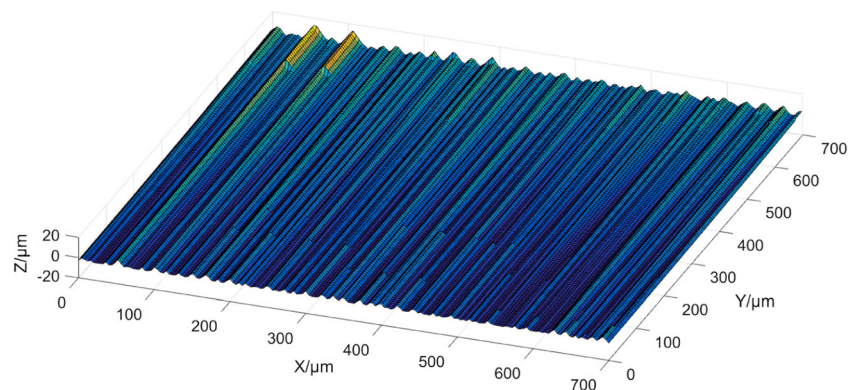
Grinding workpiece surface obtained at $f_d = 50$ $\mu\text{m}/\text{r}$, $A = 6$ μm , and depth of cut = 11 μm
